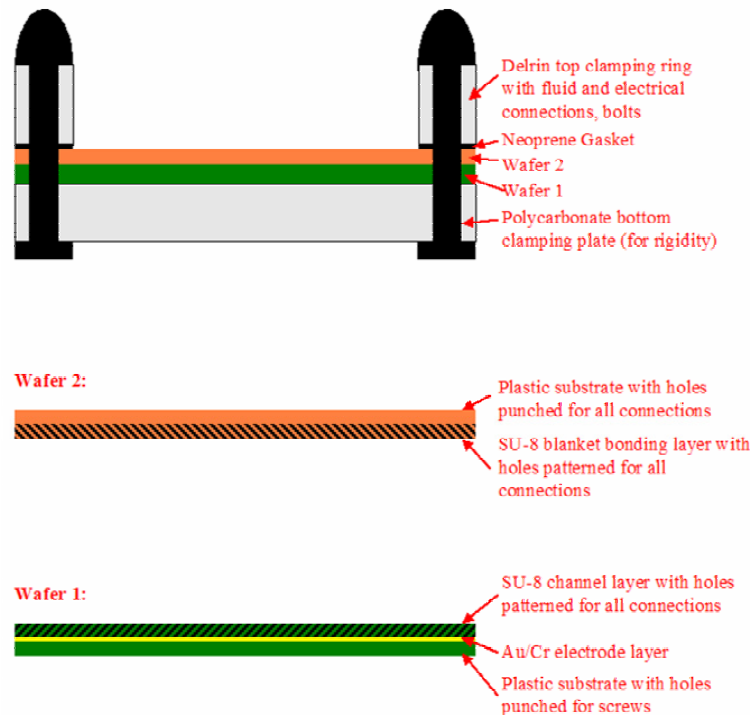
shows the overall packaging concept for the ring packaging. A ring-shaped plate on top and a circular plate on the bottom clamp a plastic wafer patterned with microchannels and electrodes. The plastic wafer must be designed with holes through which the bolts that hold the packaging together can pass. A Neoprene gasket, cut to match the holes in the top ring, lies between the top ring and the wafer to seal the fluid reservoirs at the edge of the six-fold symmetric microfluidic chip.
